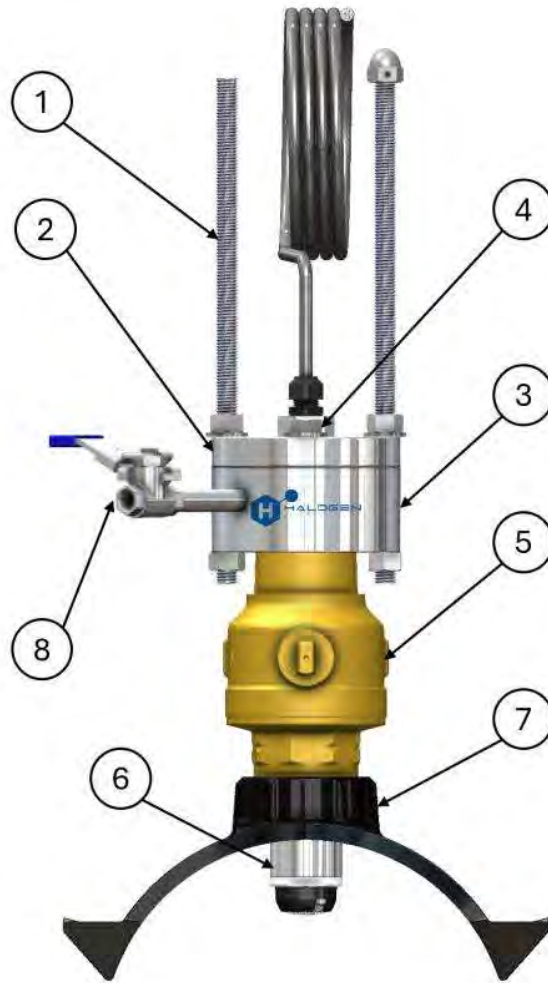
Drinking Water unit installed in pipe and detail of installation components.
